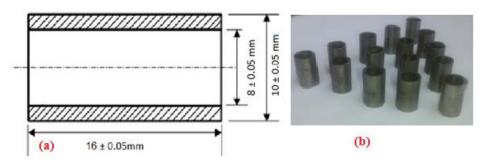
(a),(b) Brass work pieces used in trials and its dimensional details
